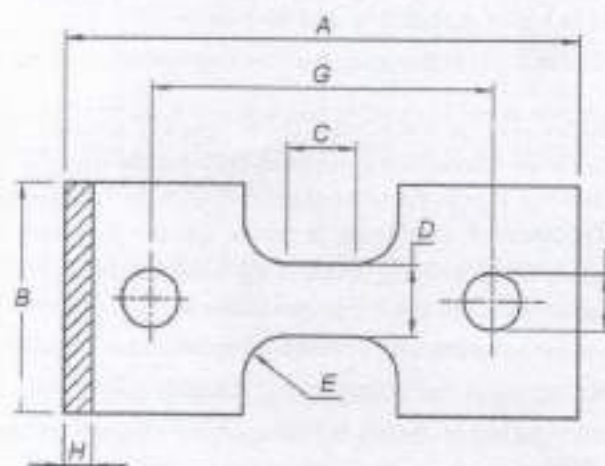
MACHINE TYPE B TENSILE TEST PIECE (FOR $E \geq 25$ mm)
